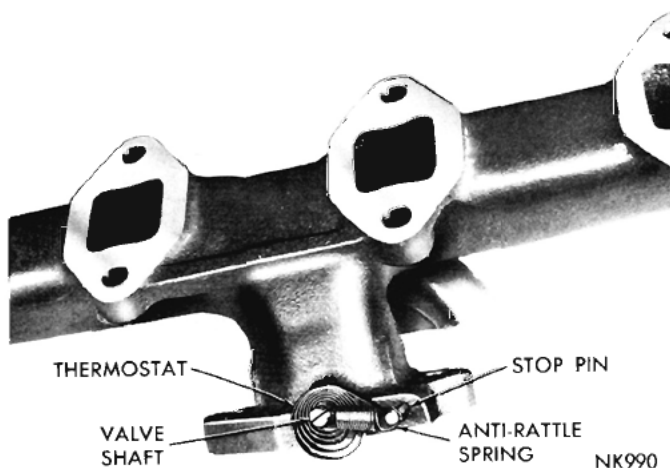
Manifold Heat Control Valve—Center Outlet Manifold (361, 383 and 426 Cu. In. Engines)
